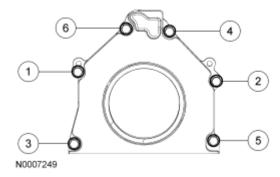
Tightening Sequence Of Crankshaft Rear Seal Retainer Plate Bolts Courtesy of FORD MOTOR CO.
